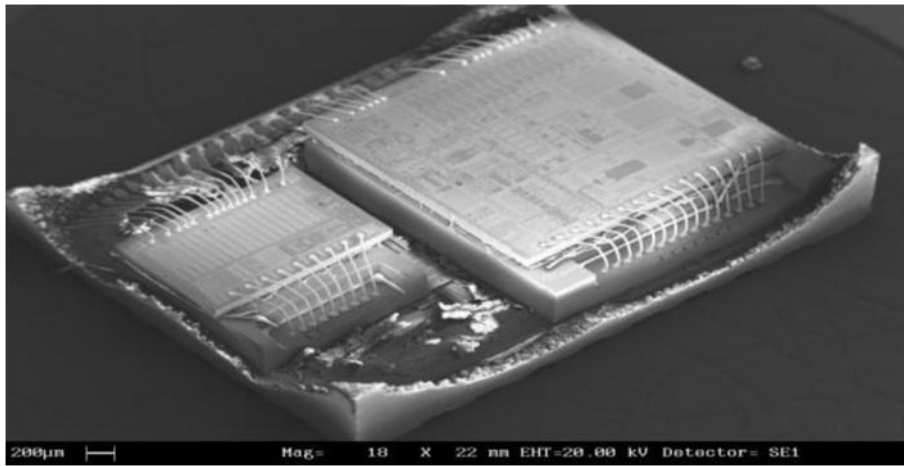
6-axis inertial motion sensor in  $3 \times 5.5 \times 1 \text{ mm}^3$  package fabricated on two different silicon dice and assembled with the companion CMOS chip [4].
